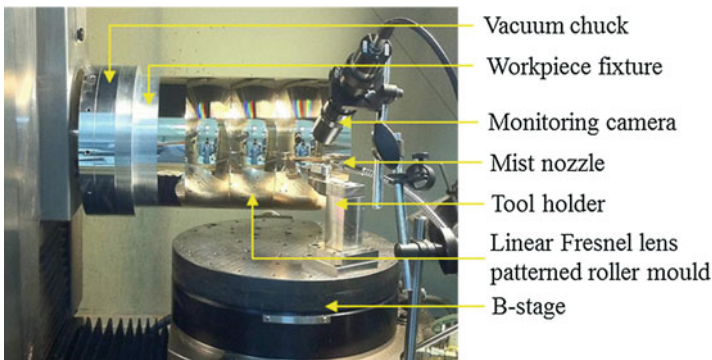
Machined brass roller mold held on an ultraprecision machining system
